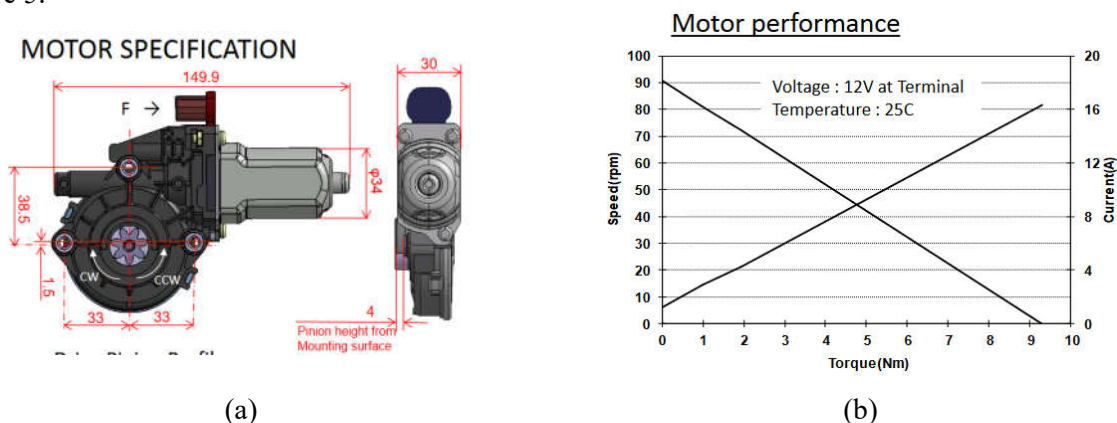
The characteristic of DC motor rotary driver (a) motor specification; (b) motor performance.
